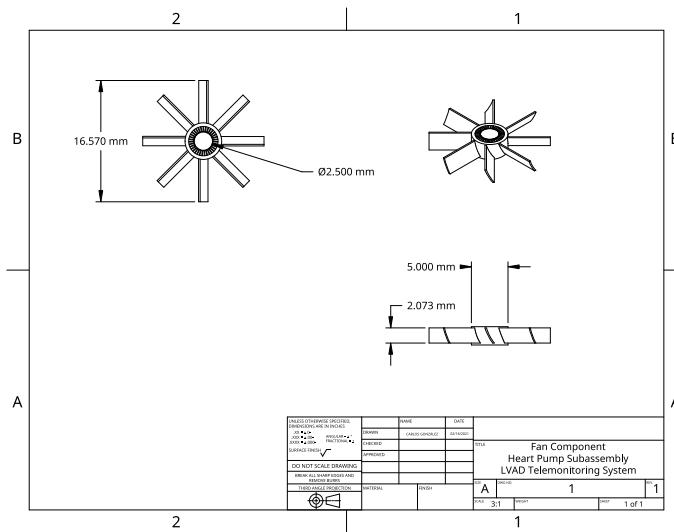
OPEN-END ROTOR DETAIL DRAWING
